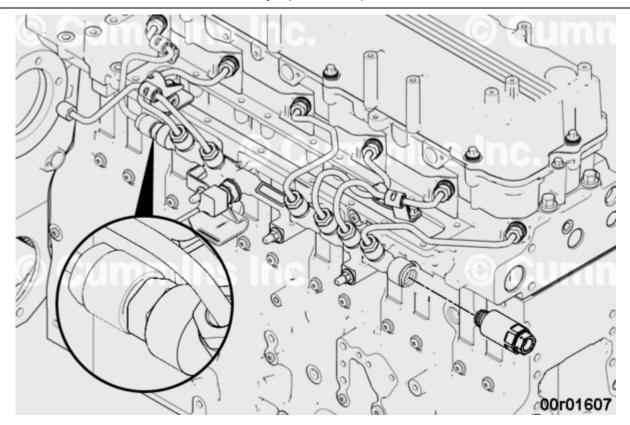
, Removing the pressure relief valve and the high pressure fuel fitting.
